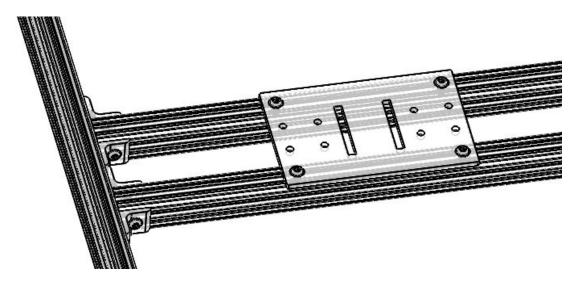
Fixture base plate (#KGT) fixed on the two beam (#HJXQ) with end feed fasteners (#TEBK)
